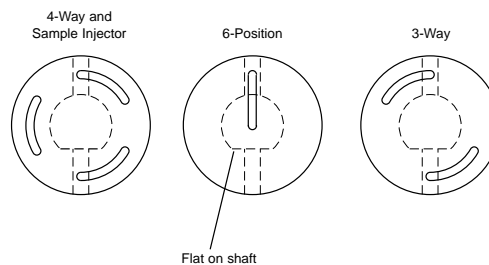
Orientation of rotor on shaft as viewed from rotor face.
